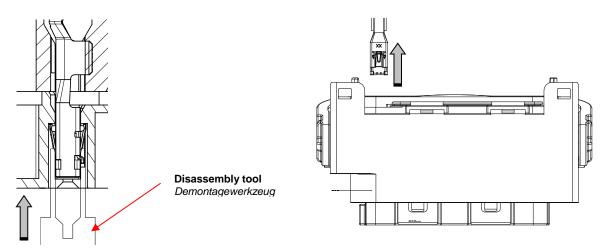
disassembly of the retainer / Demontage der 2. Kontaktsicherung
